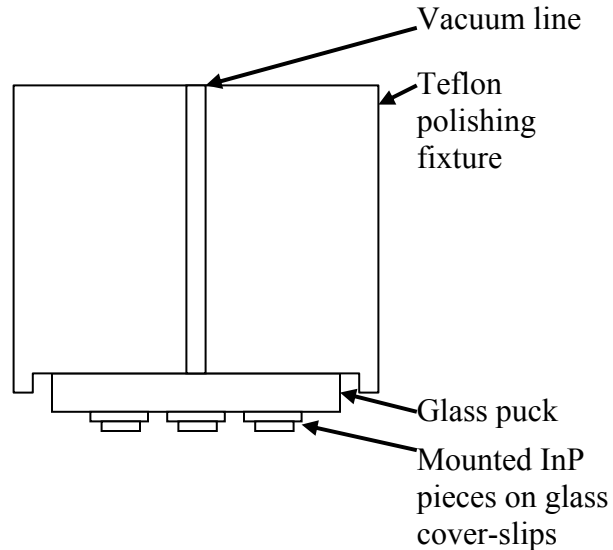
Side-view schematic of hand-held Teflon polishing fixture.
